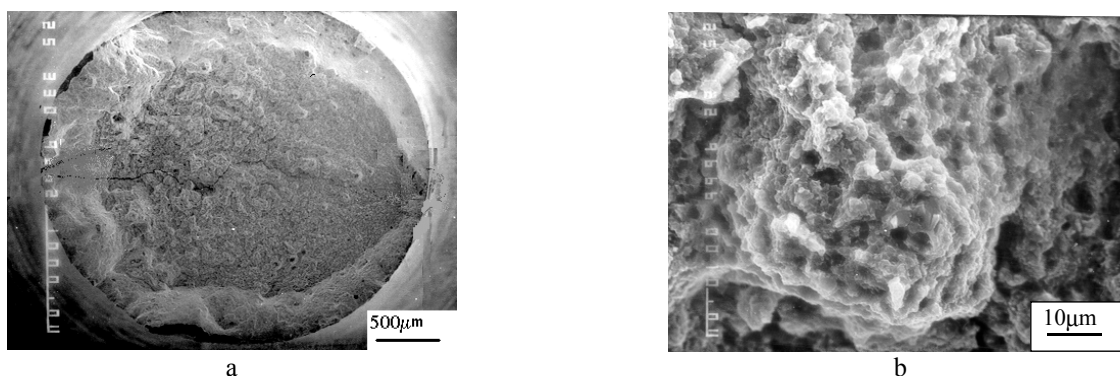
Fracture surface in tensile test of rod samples in T6 condition, alloy Al-12Zn-3.0Mg-1.2Cu
